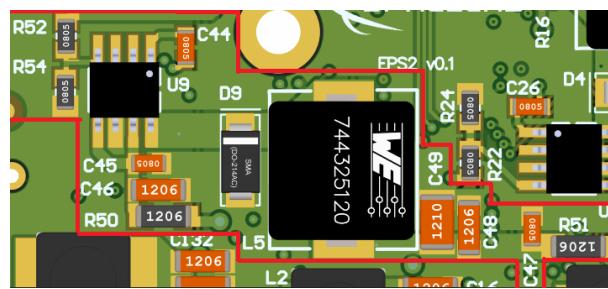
EPS/TTC regulator circuit on the PCB.
